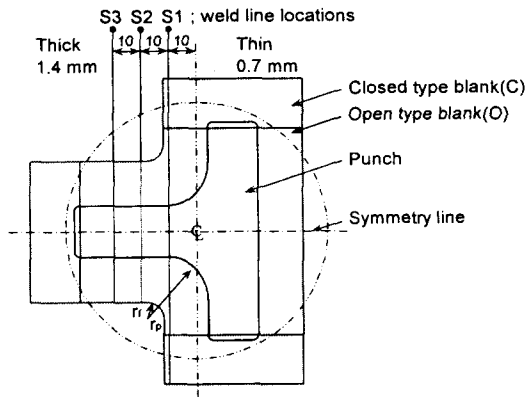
Blank types (Closed and Open) and weld line locations (S1, S2, and S3)
